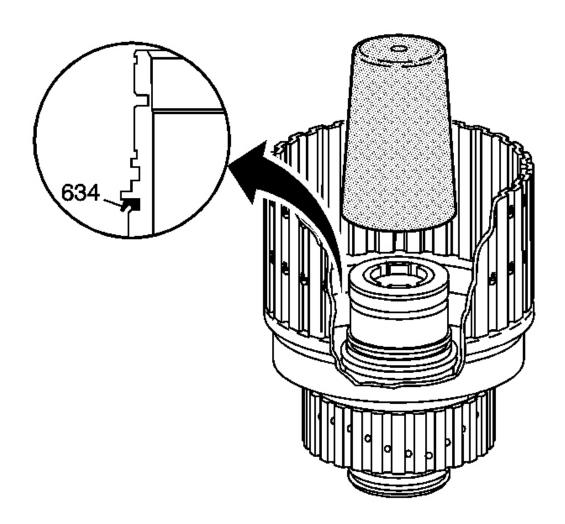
Identifying Input Clutch Piston Inner Seal Courtesy of GENERAL MOTORS CORP.
